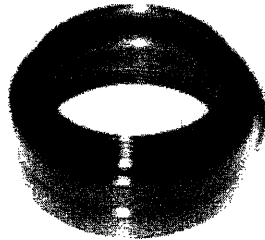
The tubes have been placed together, with the stock tube fitting over the top of the removed threads of the machined tube.
